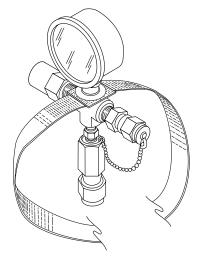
Pressurizing Fixture P/N B-701067-00
